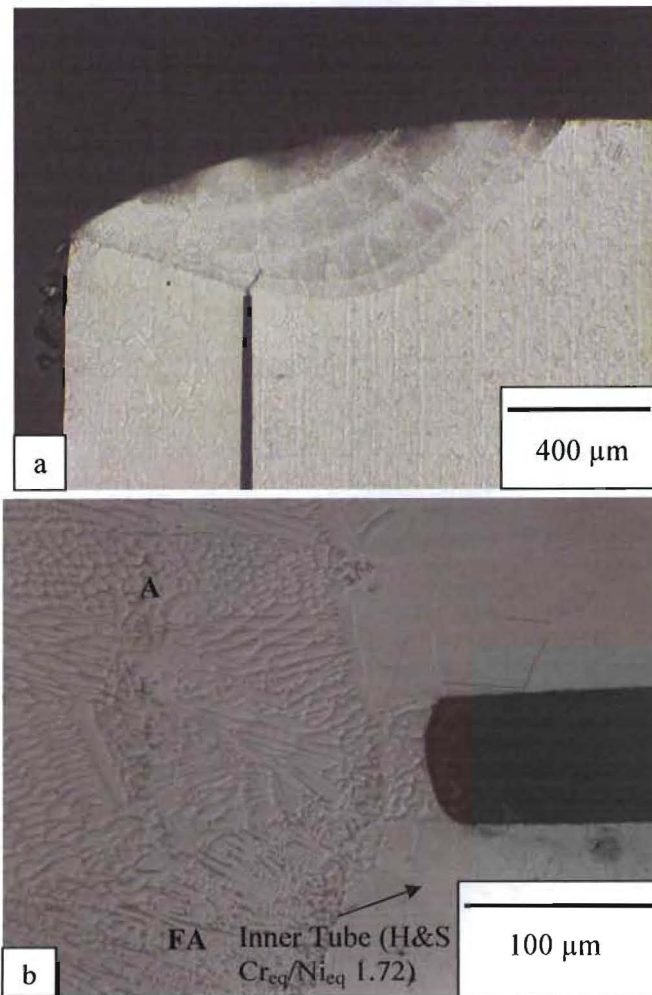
Cross-section of GTAW processed materials showing weld solidification cracking in (a) and variable PSM in (b).
